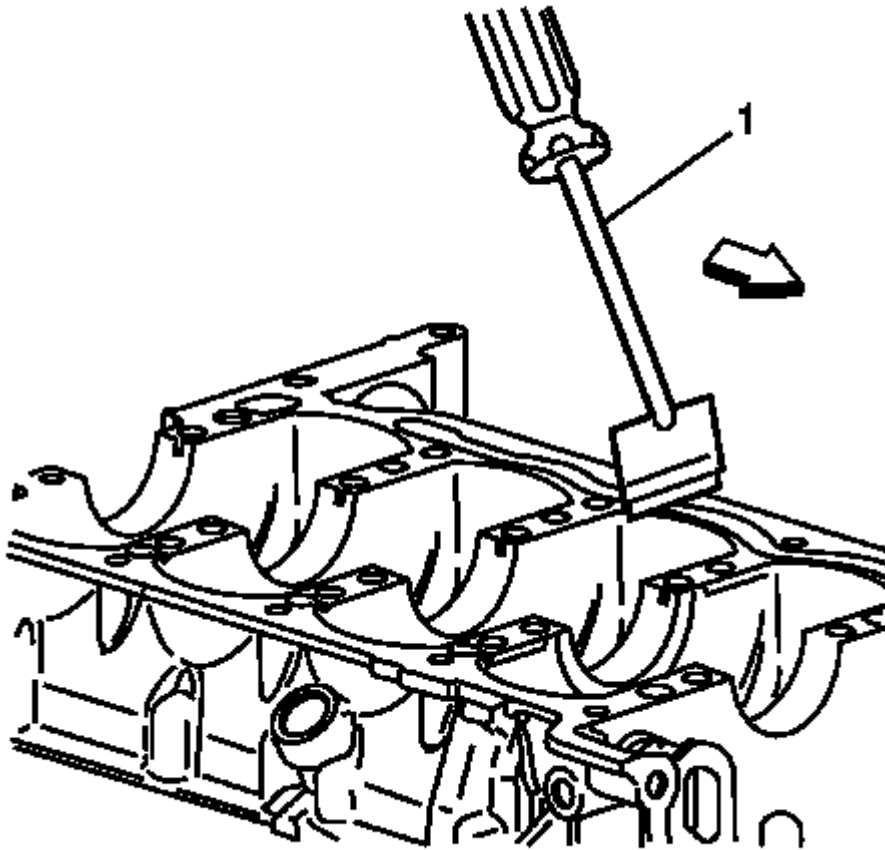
Clean Sealing Material From Gasket Mating Surfaces On Lower Crankcase Engine Block Side With Suitable Tool
